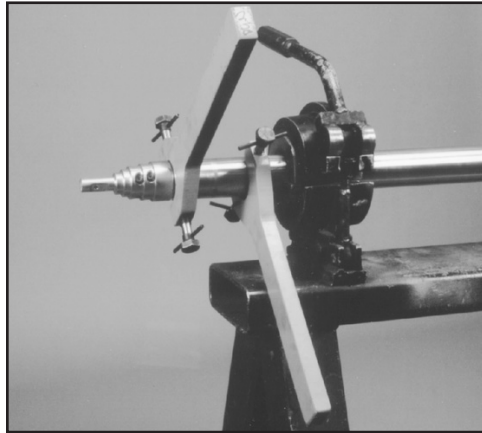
SPANNER FITTINGS & HAMMER ON SPANNER
